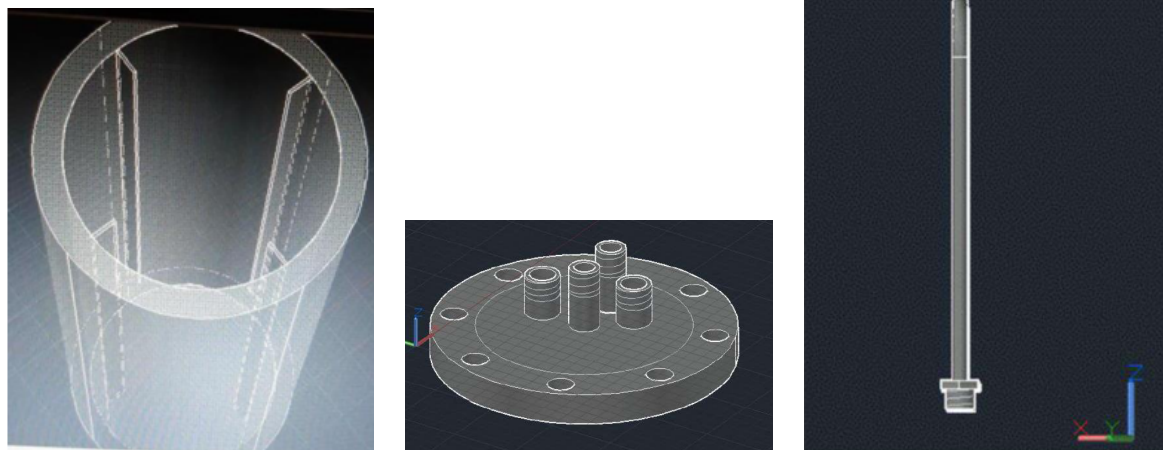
3D CAD drawings of hydrolysis batch reactor components (From left to right; reactor body, reactor cover and thermometer rod).
